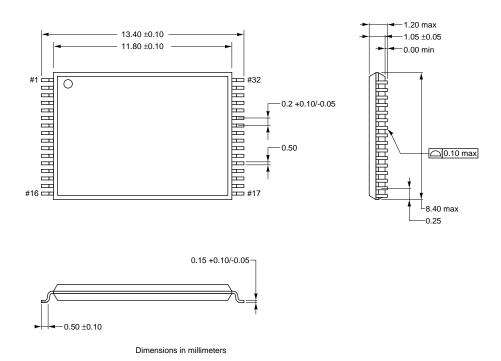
32-Pin sTSOP (Type I) 8 x13.4 Forward Package Dimensions
